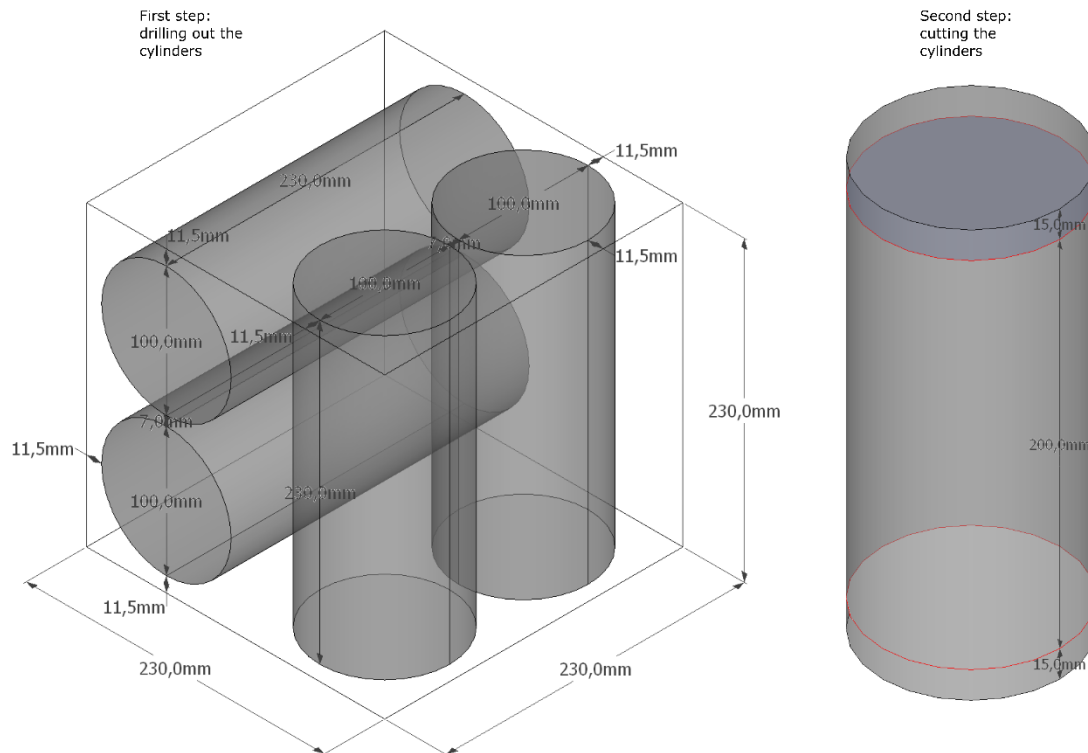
Show the two steps of the drilling and cutting and approximate dimensions of the cylinders.
